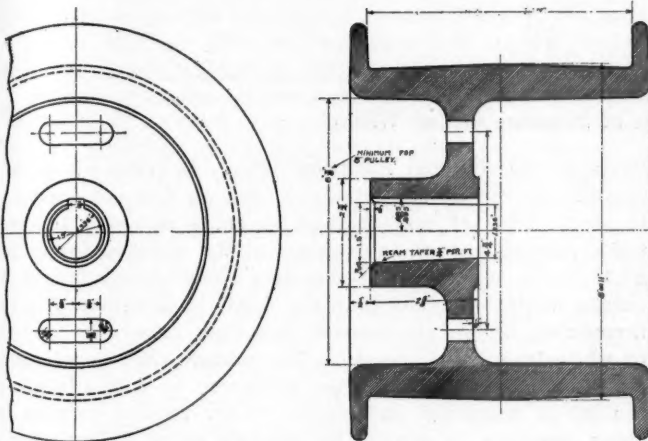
Armature Pulley for 8 in. or Larger Pulleys for Sleeve Bearing Generator
